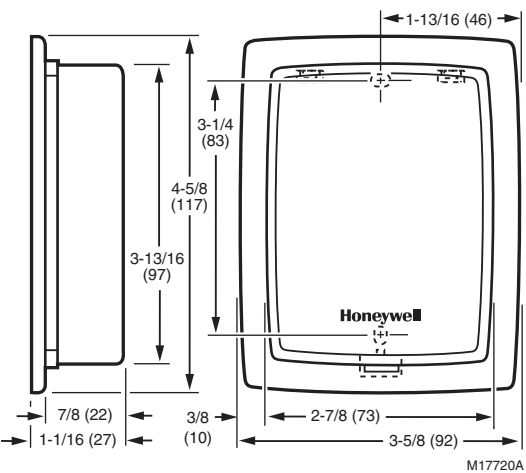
C7600B, H7665A Dimensions in In (mm).
